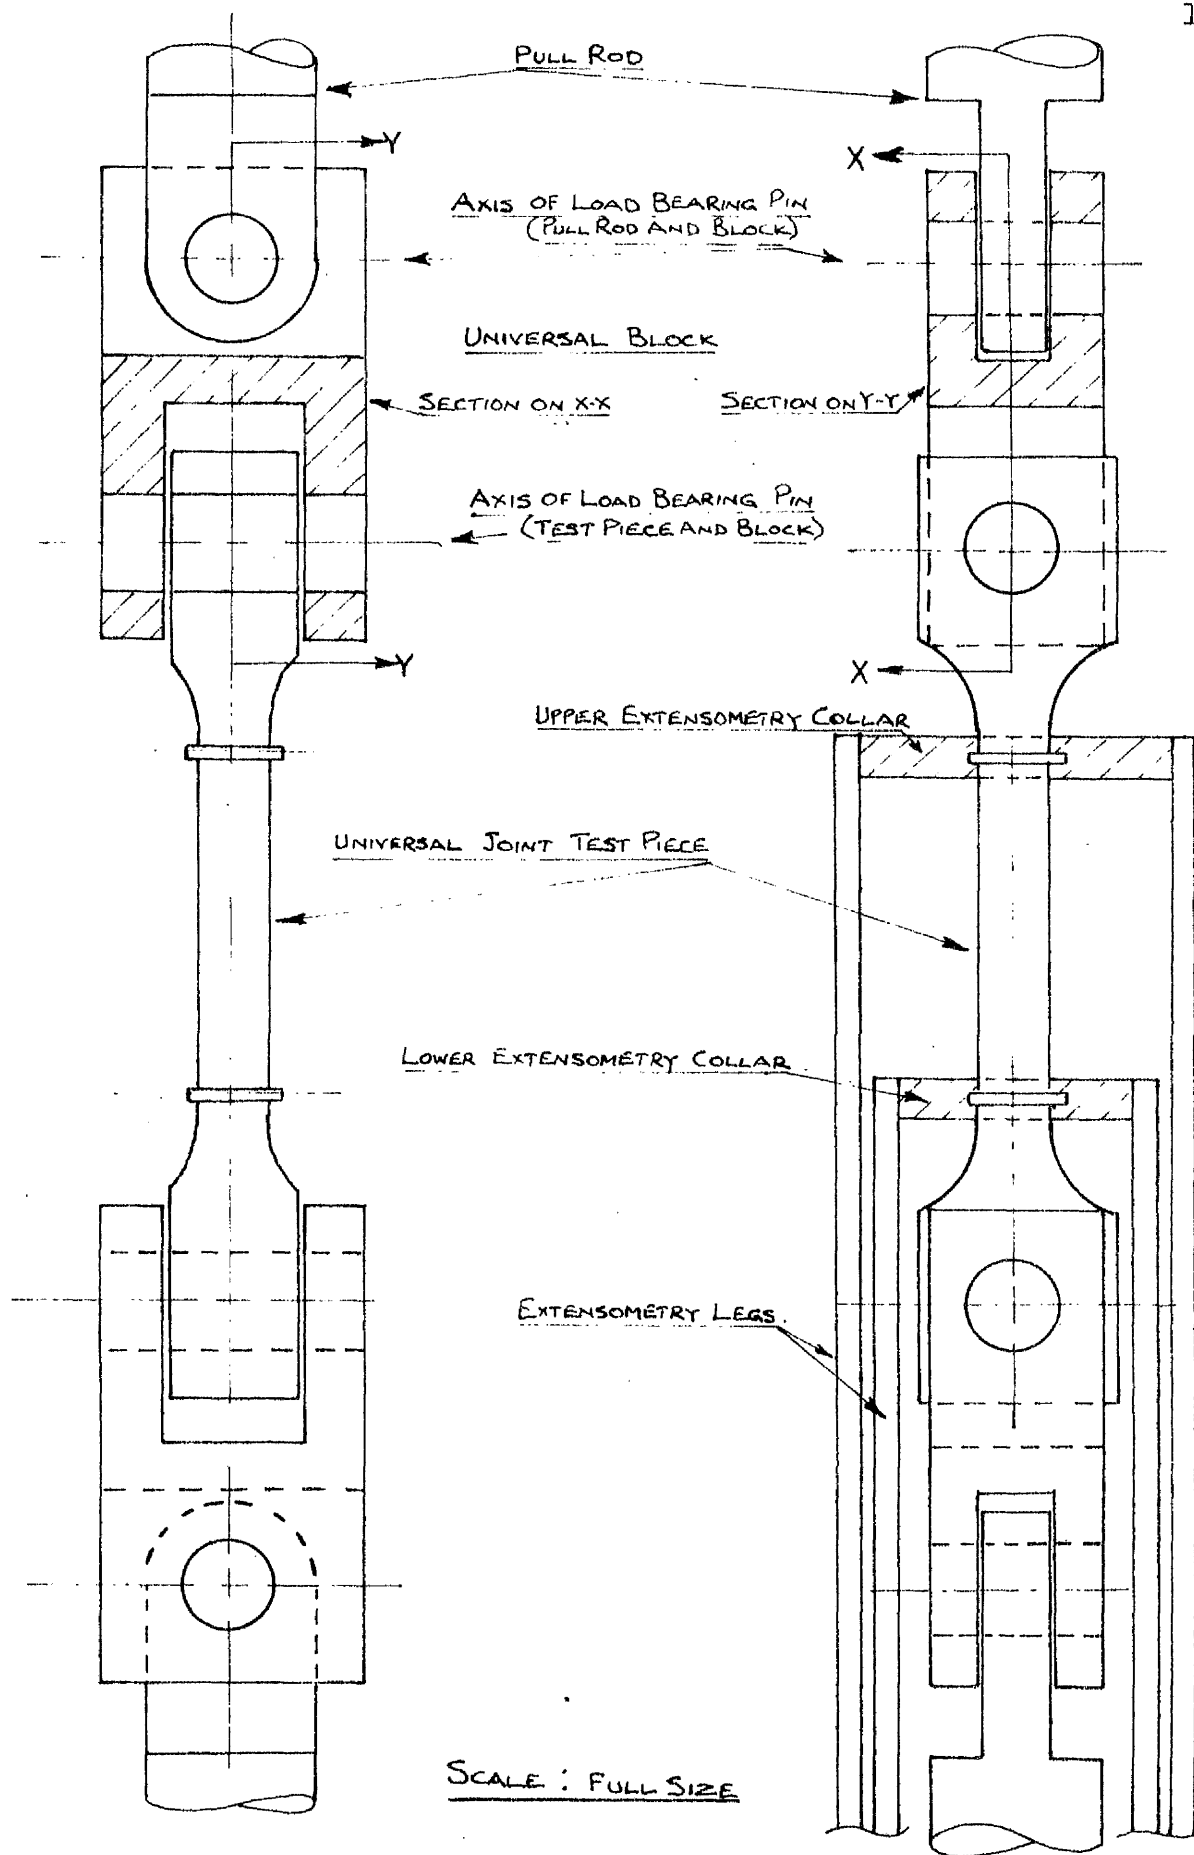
Assembly of Test Piece, Grips and Extensometry
